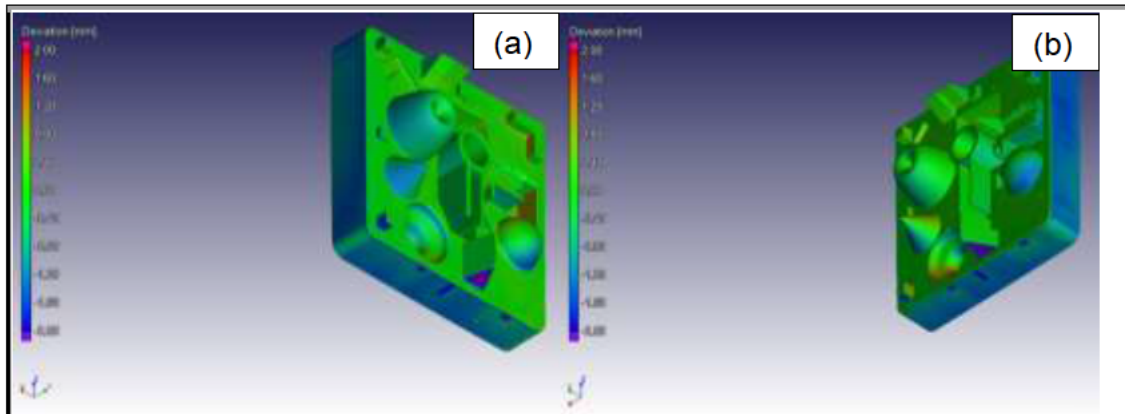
3D images: (a) bottom-right-back and (b) bottom-back-left
